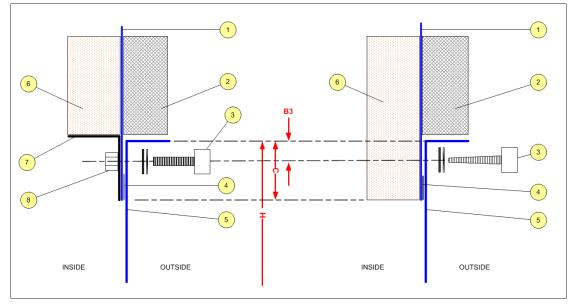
Assembly of filter plates with an installation frame (right) and directly screwed to the cage (left)
